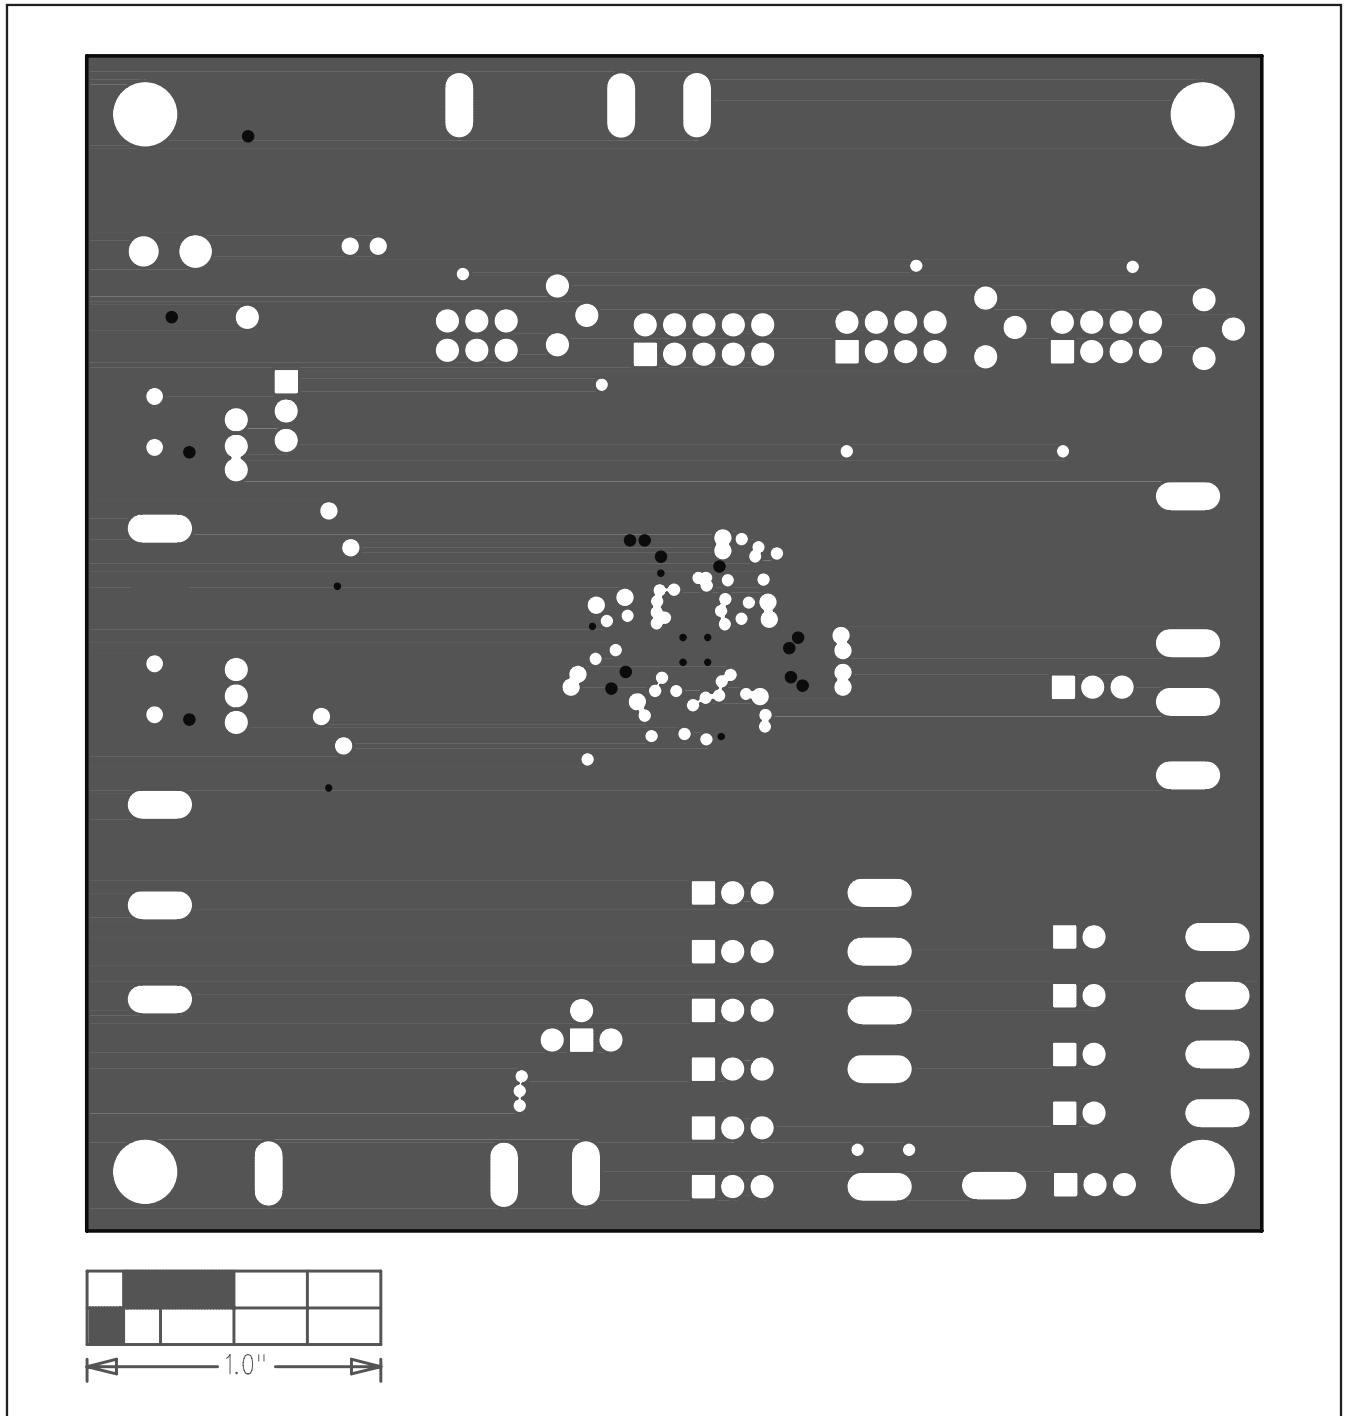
MAX8671 EV Kit PCB Layout—Ground Layer 2
